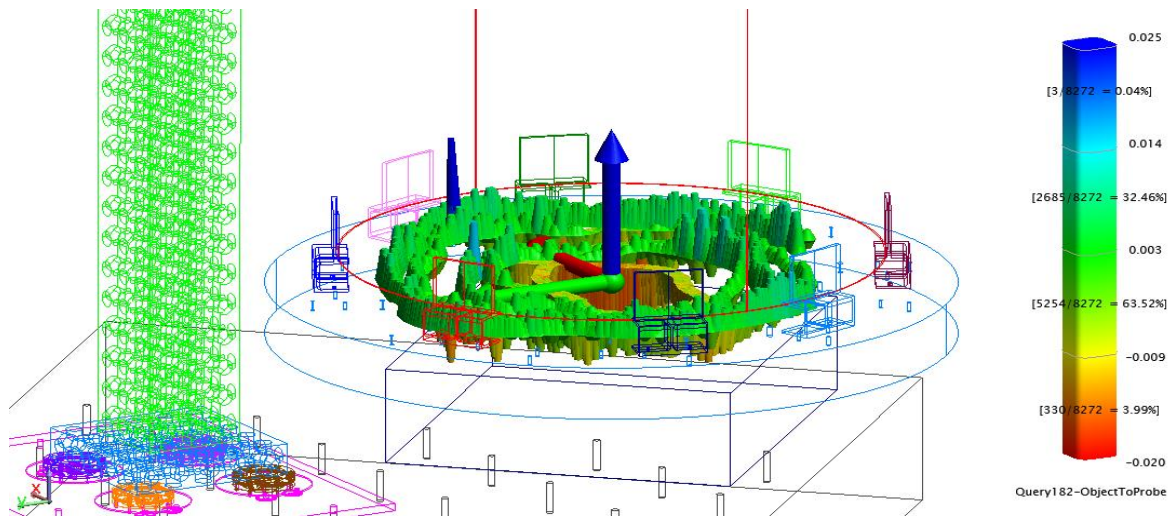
CAD and vector plot of metrology rotary table integrated into assembly tooling to reduce tooling set up and verification labour. Measurement datum constructed at centre of rotary table and verified with laser tracker to be within $\pm 0.008\text{mm}$ of nominal CAD geometry [115].
